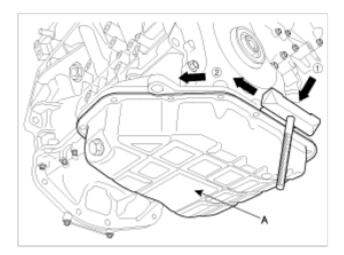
Inserting Blade Of SST (09215-3C000) Between Upper Oil Pan And Lower Oil Pan
